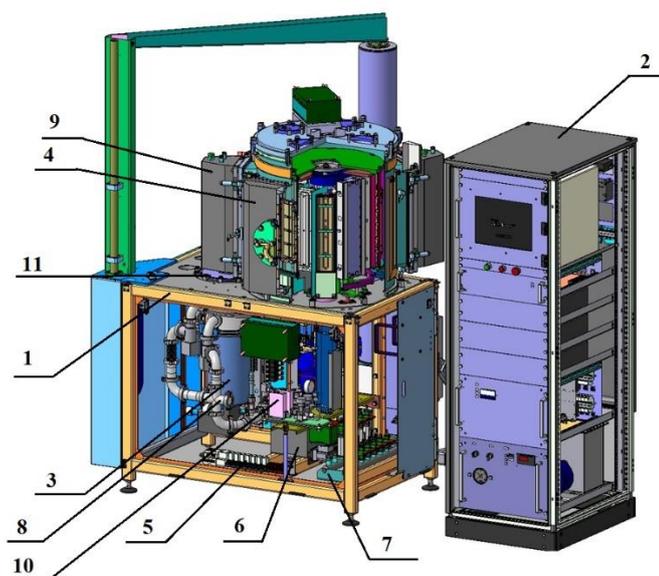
Diagram of the Caroline D12C magnetron sputtering system [6] 1 - technological module, 2 - control cabinet, 3 - fore-vacuum pump, 4 - working chamber, 5 - vacuum system, 6 - pneumatic equipment panel, 7 - water block, 8 - hydraulic equipment block, 9 - lifting and turning mechanism, 10 - gas supply panel, 11 – shutter
